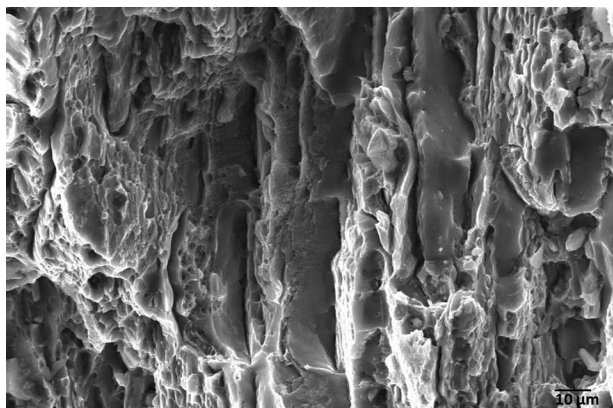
High magnified image of the fracture surface shown in Fig. 148
